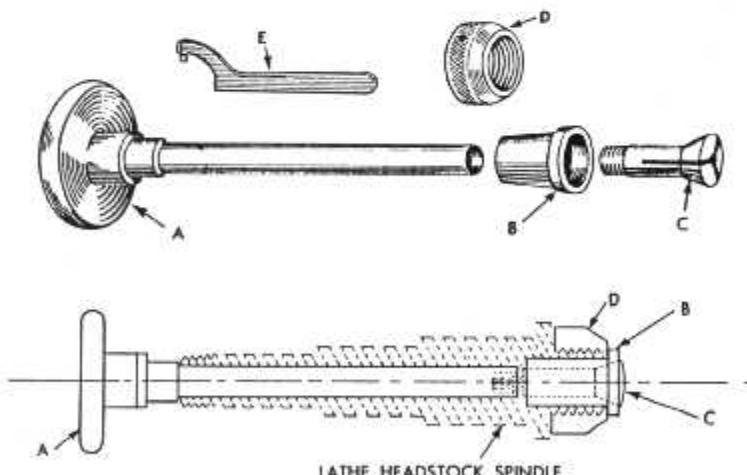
DRAW-IN COLLET ATTACHMENT
